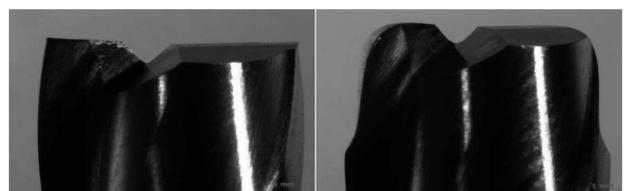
Used tool (milling cutter HSS Ø 8 mm): a) before milling, b) after milling – duration 10 min, $v_c = 125,6$ m/min.
